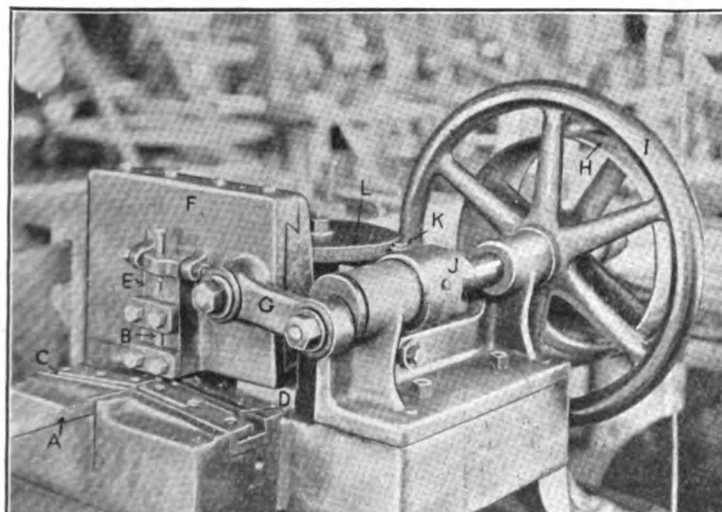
A TOOTH-CUTTING AND SETTING MACHINE
